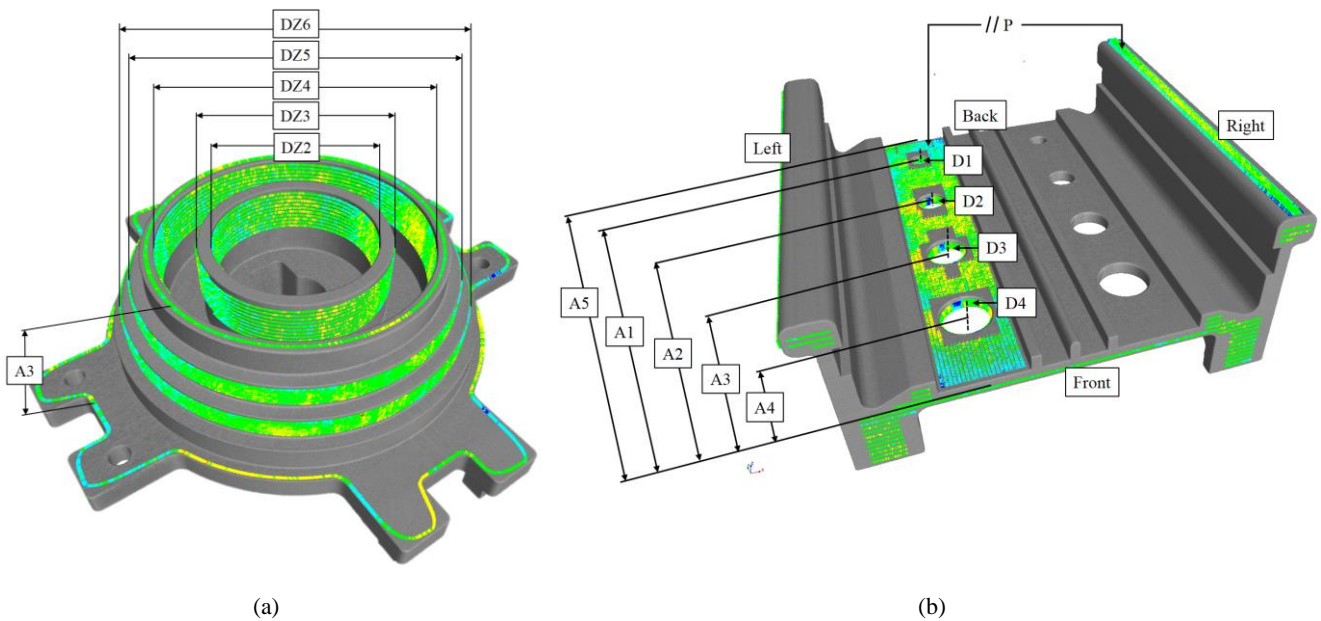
Definition of measurands and visualization of the (tactile) sampling path for the stepped cap (a) and ED housing (b).
